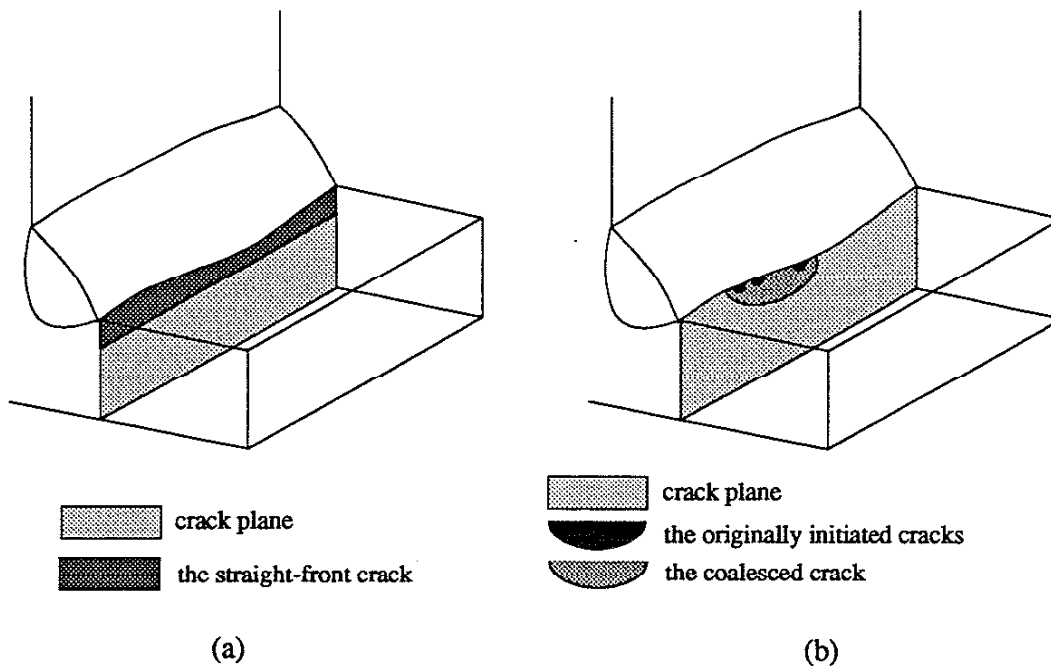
(a) Straight-front crack in a weld toe, (b) Multiple crack initiation and crack coalescence.
